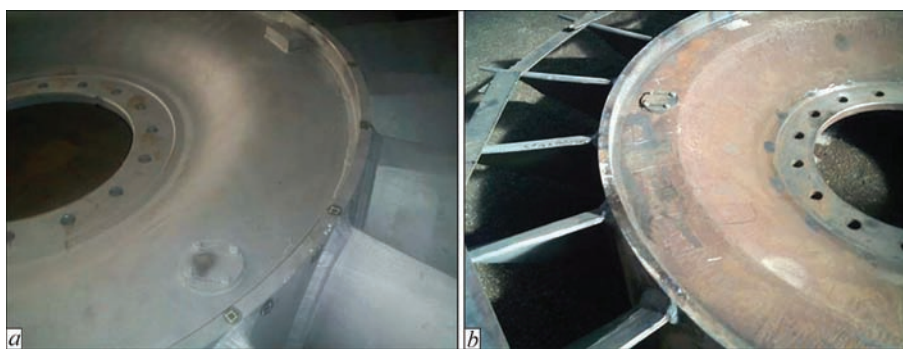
Smoke exhauster impeller with stamped (a) and welded (b) disk
